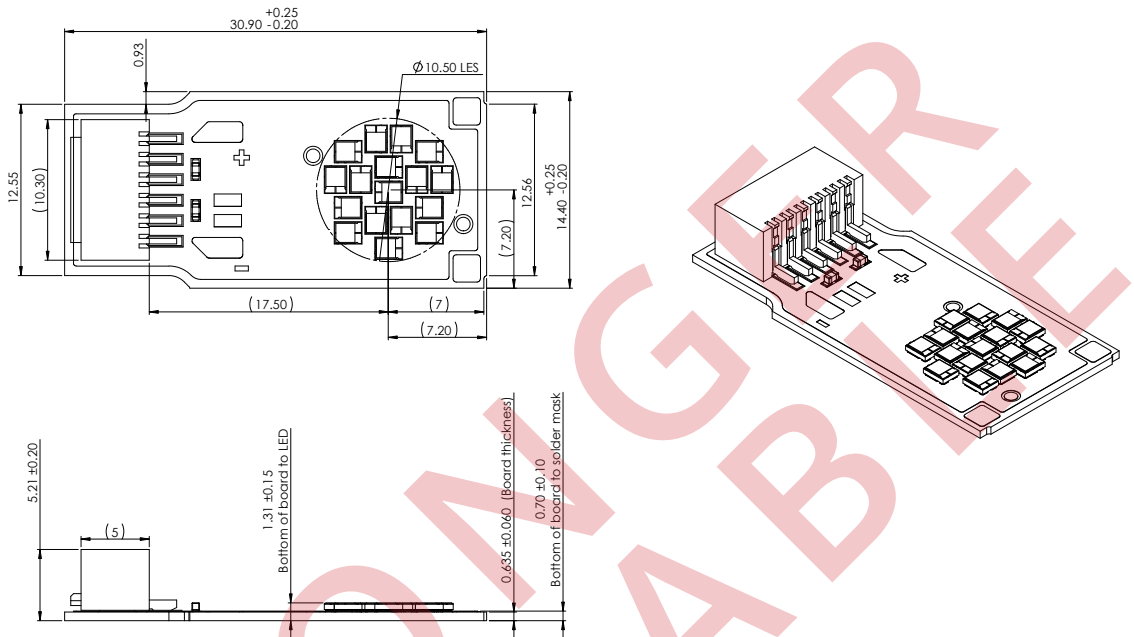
Package outline drawing for LUXEON S2000 / LXSx-Pxxx-0017.
